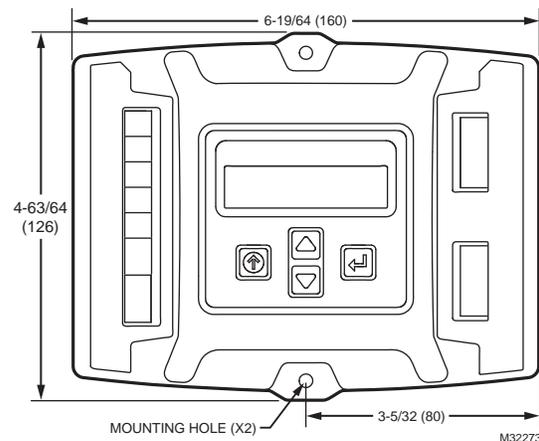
Dimensions in inches and (mm) showing mounting holes.
